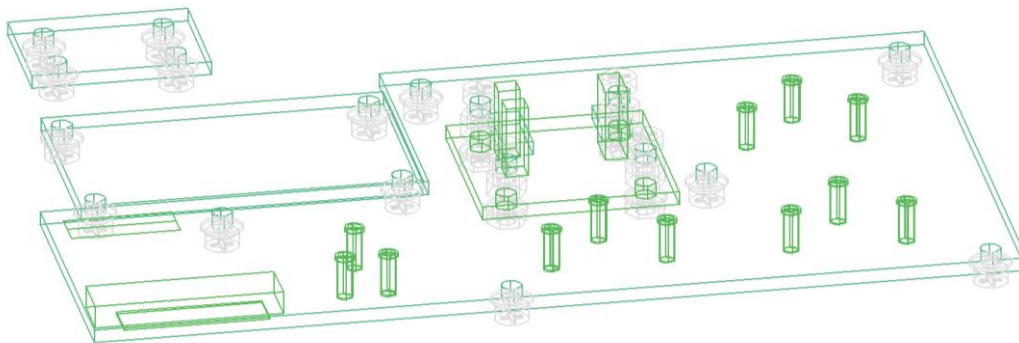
3D view of the main PCB accompanied by the daughter PCBs
